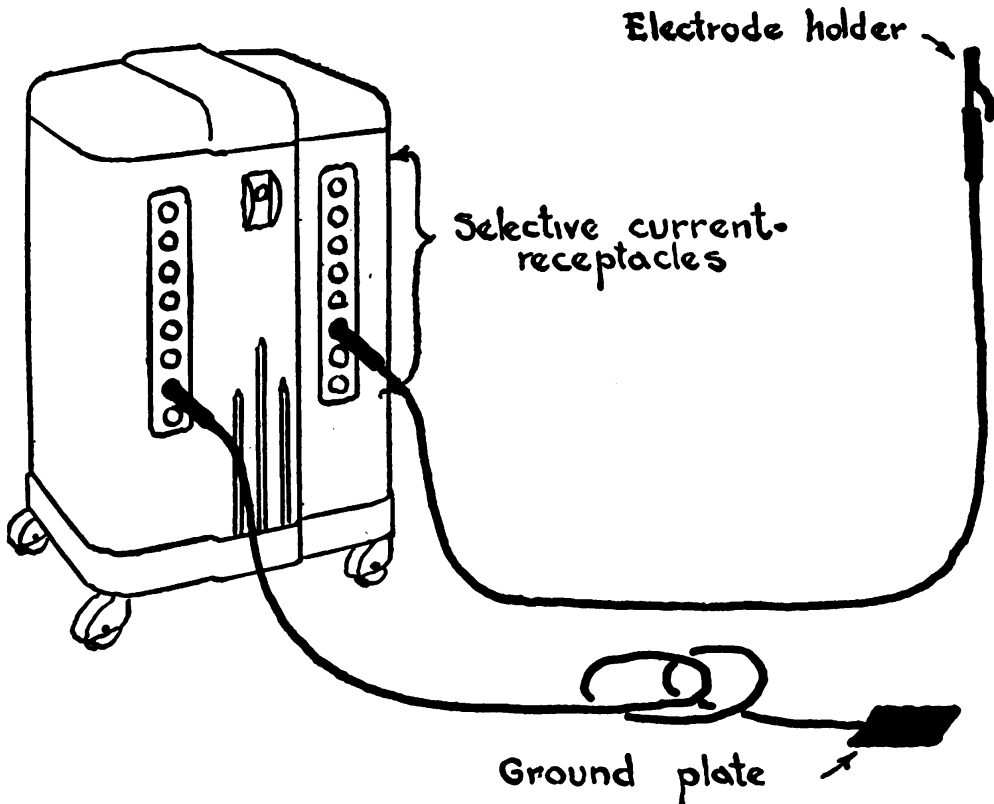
Typical transformer type, alternating current, arc welding machine.
